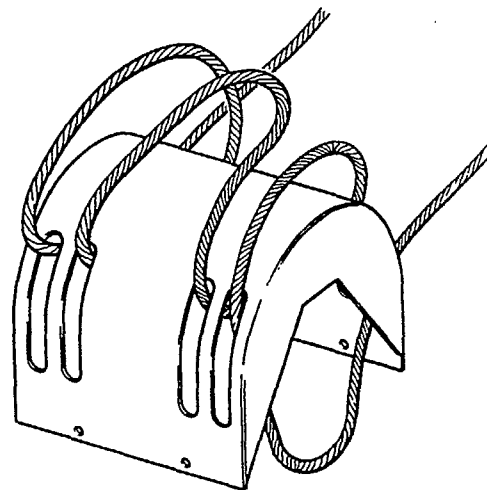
Wire Rope Threaded through Sheave Guard of Bottom Block for Four Part Double Reeving
